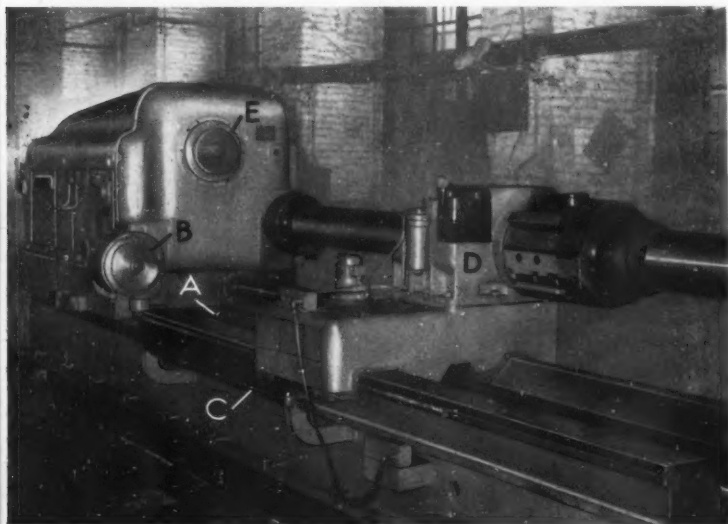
This Special Boring Unit is One of Three to be Incorporated in an Installation for Machining Electric Motor Frames. The Boring Bar has Provision for Feeding the Cutting Tool Radially
